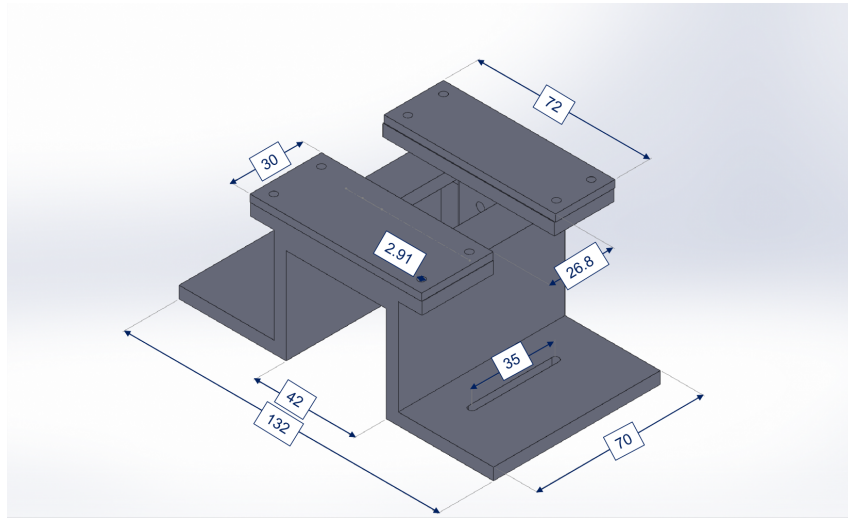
Solidworks engineering drawing of the designed assembled sample holder. All dimensions are in mm.
